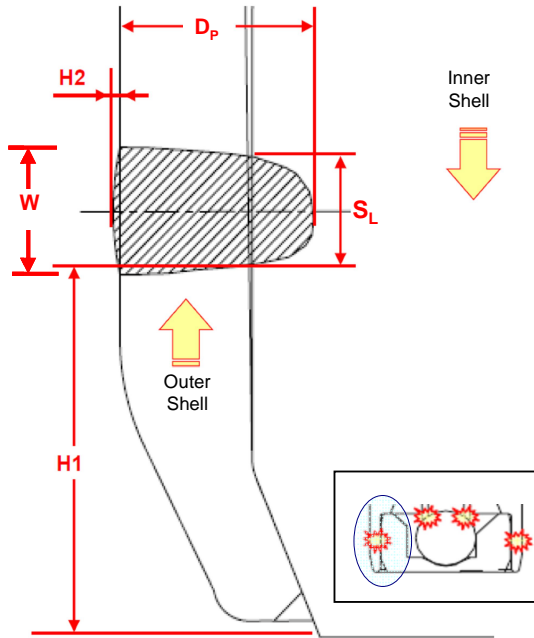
Characterization of welding cross-section (W: Weld width, D_p : Weld penetration depth, S_L : Weld resistance length)
